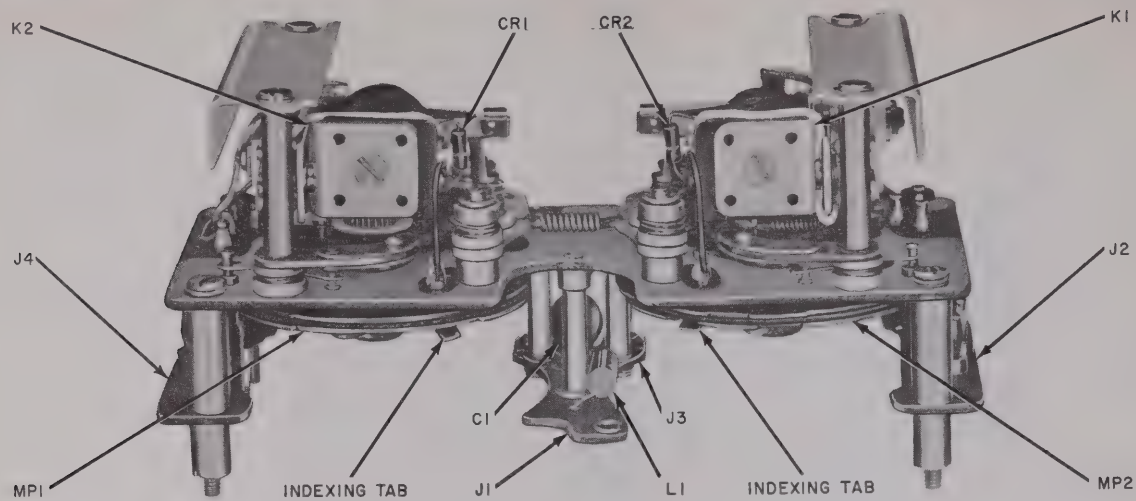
R-34A Receiver, Tuner Assembly, Right Side View
